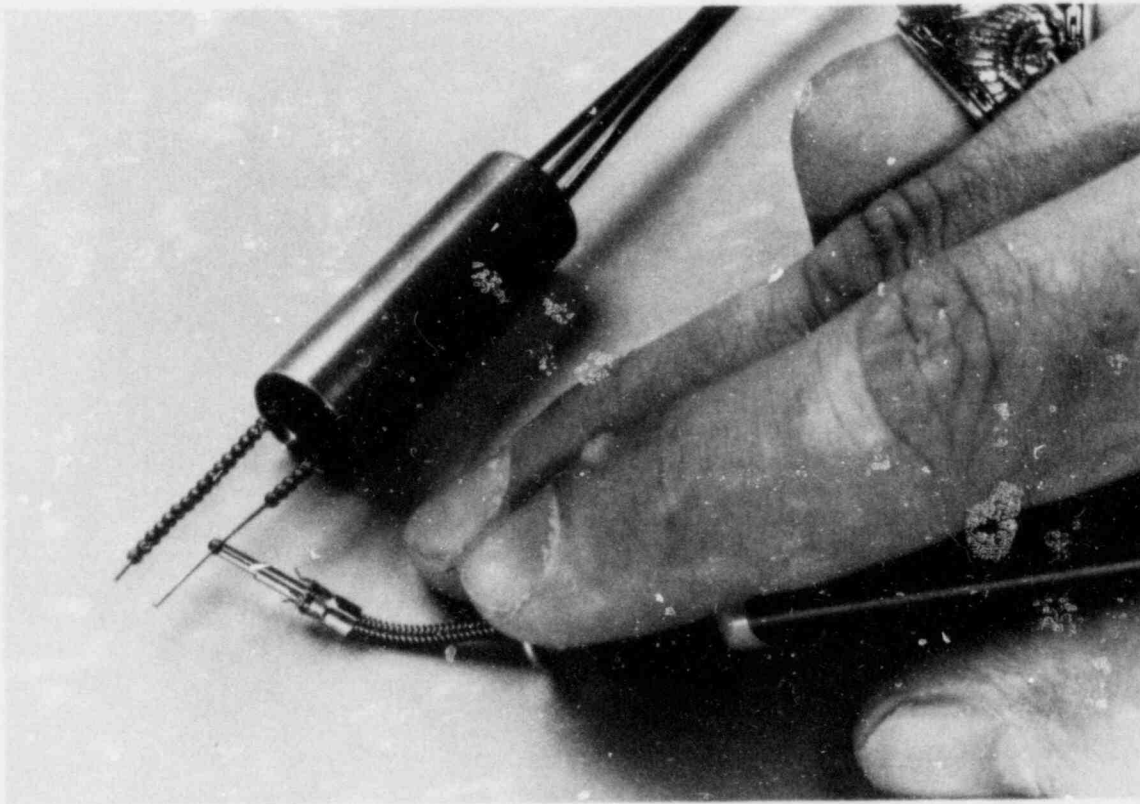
Installation of 1.60-mm-diam (0.063-in.) sapphire bead insulators on platinum leads extending from the triaxial cables before laser welding the end cap to the sensor subassembly.
